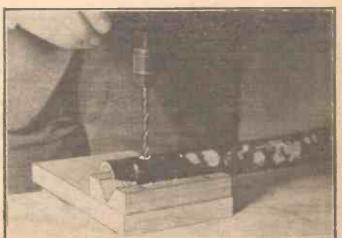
Drilling a 5/32in. dia. hole, 1in. from the end.
